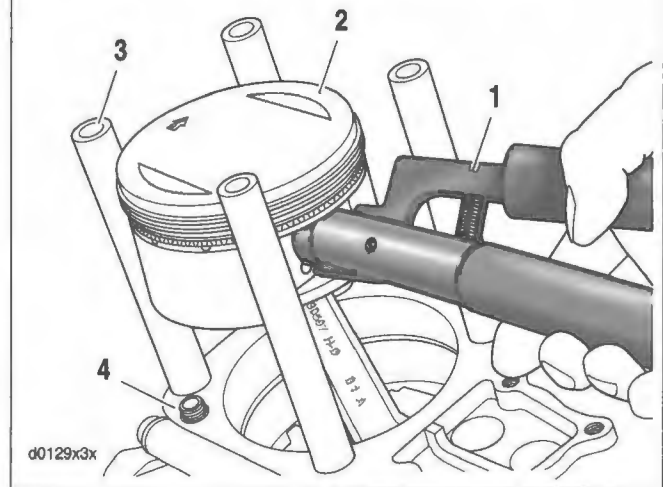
Piston Pin Circlip Removal (Part No. HD-42317-A)
